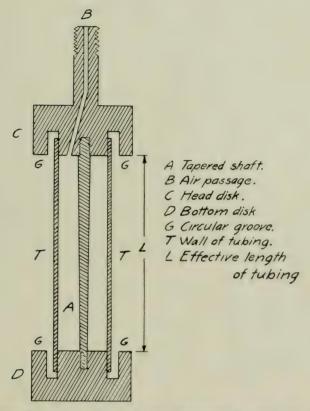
Cross-Section of Spindle for Mounting a Tube for Collapse the Grooves G were Filled with Packing and Asphaltum to Make Them Watertight
